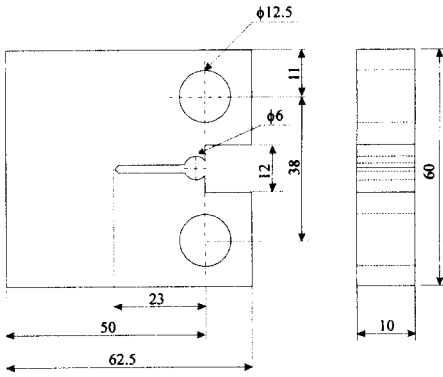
Dimension of fatigue specimens (Unit : mm)
